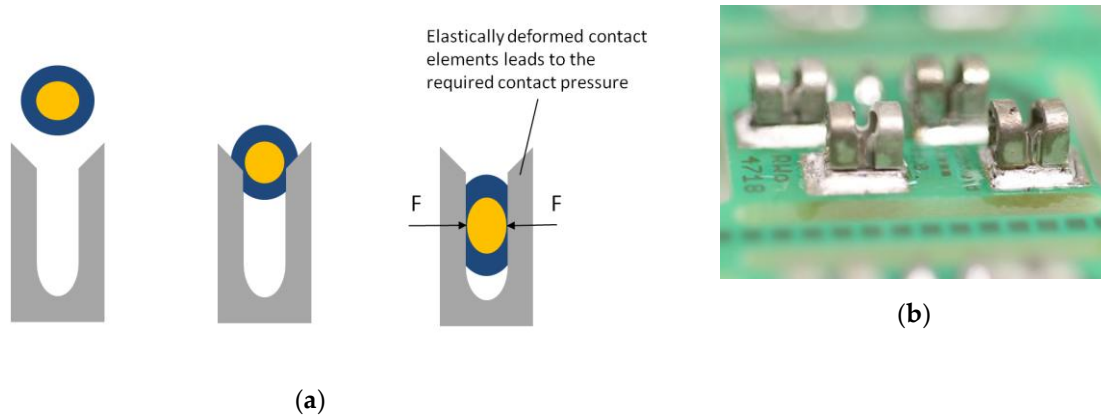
(a) Schematic drawing of the assembling of insulation displacement technology: before assembling (left), during assembling (middle), and after assembling (right) in style of Kirstein [4]. (b) Prototype of insulation displacement connections (IDCs) placed on circuit boards to integrate the boards in the textile.
